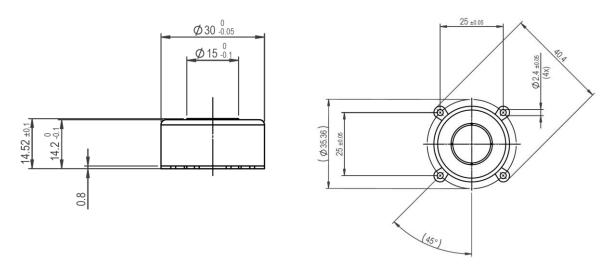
Mechanical drawing of MR-15-30 (unit: mm)
